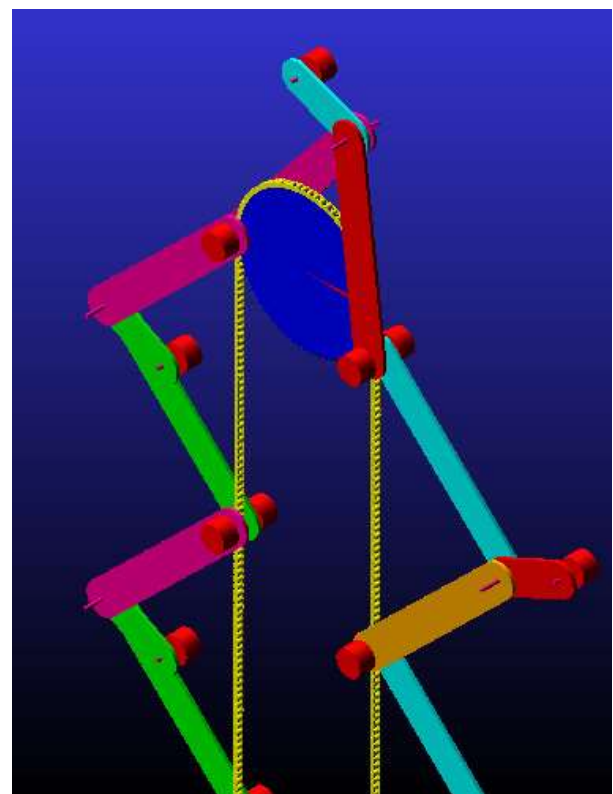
D model indicating assembly of main links, guide links, sprocket, chain, rollers and pins. (Guide way frame hidden).
